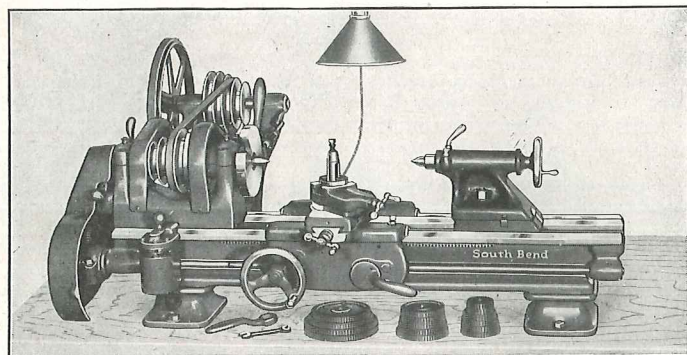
9-inch "Workshop" Horizontal Motor Driven Bench Lathe Equipped with 4-Step Single V-Belt Drive
